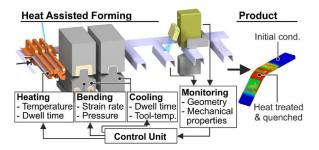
Heat assisted sheet metal forming in a progressive tool.
